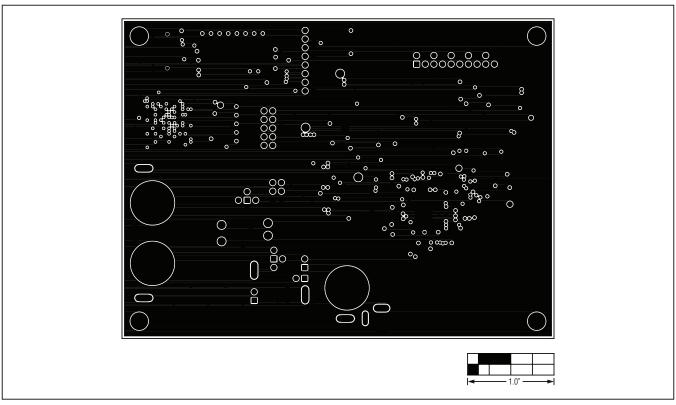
MAX98356 EV Kit PCB Layout—Layer 2
